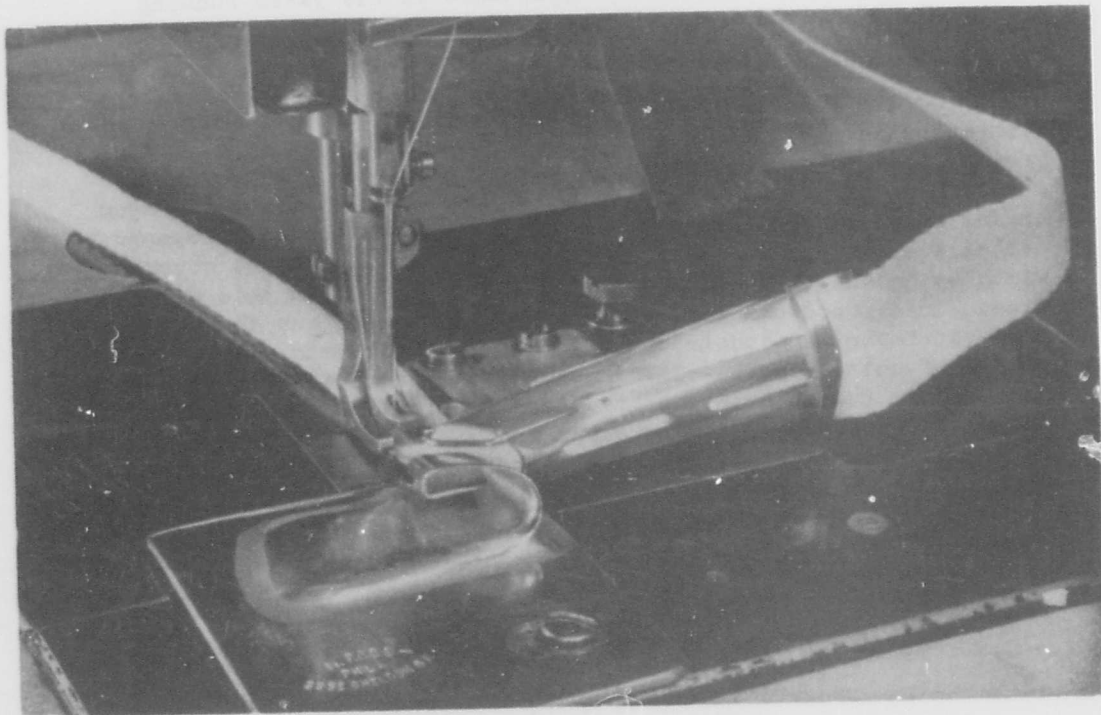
SEWING ATTACHMENT FOR BINDING AND HEMMING CENTER CUTOUT (DETAILED VIEW)
